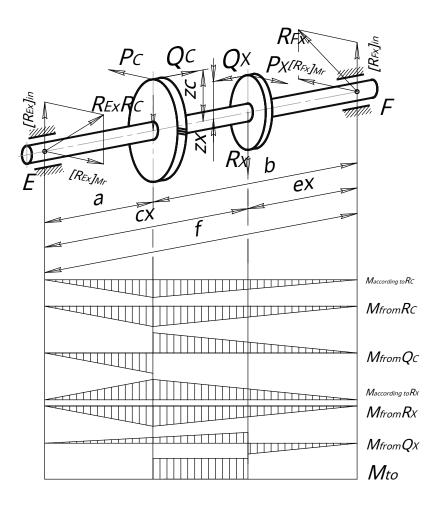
Calculation scheme of the intermediate shaft with helical gears
